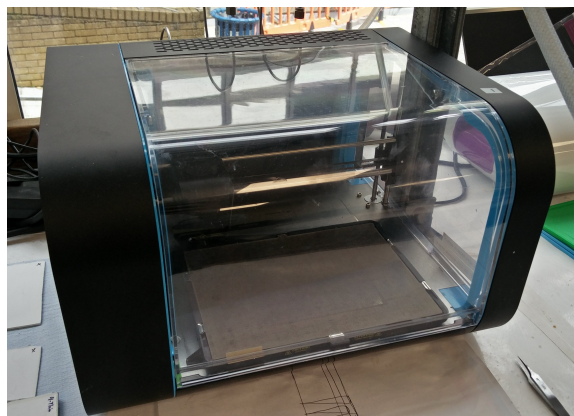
3D Printer used in mould manufacture (Robox Dual)
